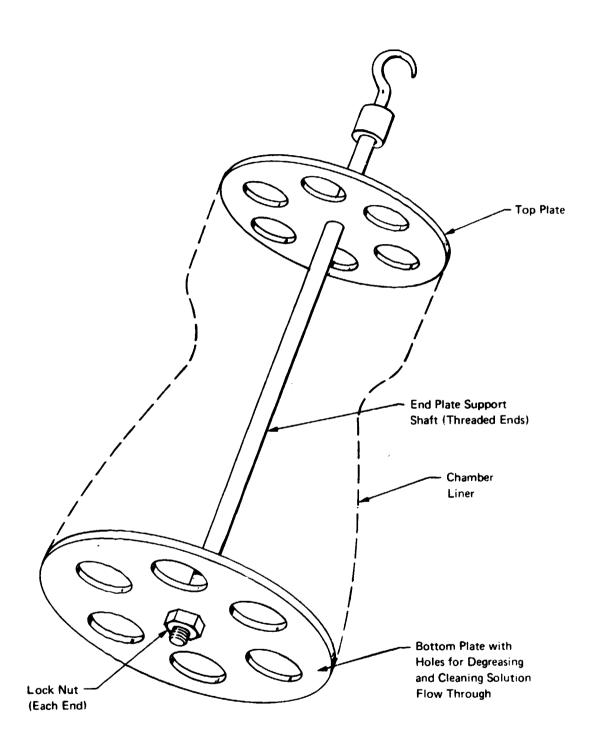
Typical Liner Fixture for Degreasing, Cleaning and Handling Operations
